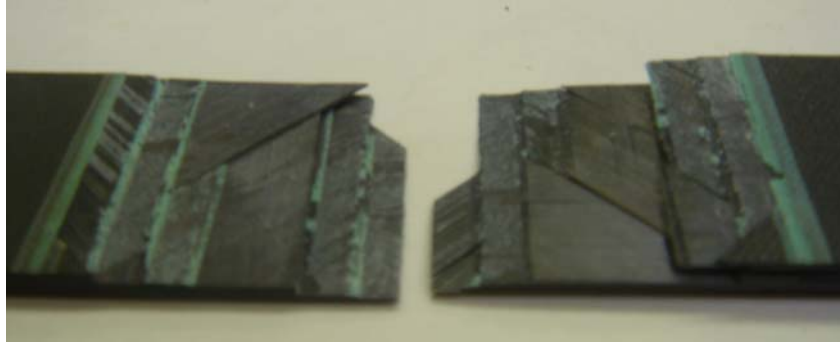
Fracture surface of stepped-lap specimen #1.
